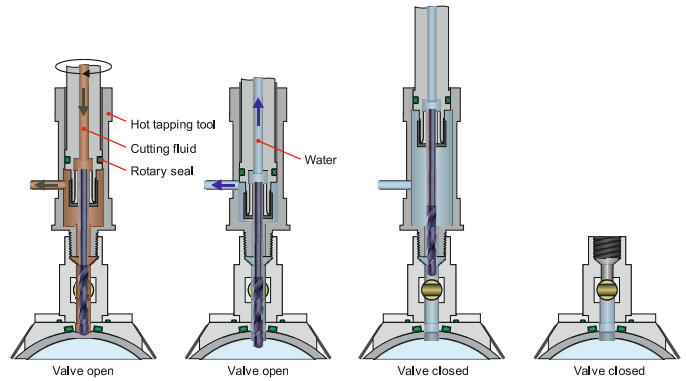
Hot tapping procedure showing: (a) initial drilling phase with through-tool delivery of cutting fluid; (b) end of second drilling phase, with flushing of valve bore by process water; (c) after withdrawal of cutter and closure of isolation valve; and (d) after removal of hot-tapping tool.
